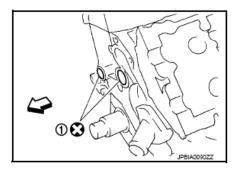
Locating Cylinder Block O-Rings Courtesy of NISSAN NORTH AMERICA, INC.
